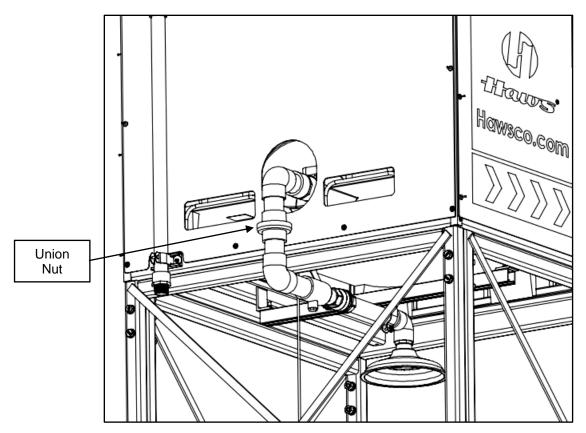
Installing the Shower Pipe Mount Steel Strut and Shower Piping Assembly to the Tank Union
